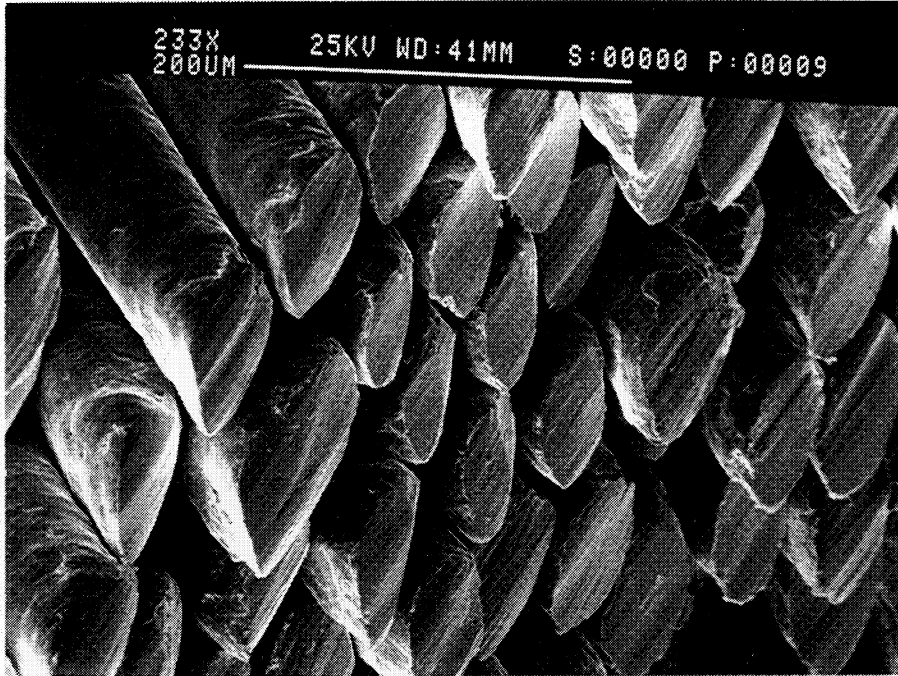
Smearing type wear of Haynes-25 bristle tips after testing in LH₂. Configuration 9. Magnification 233.
